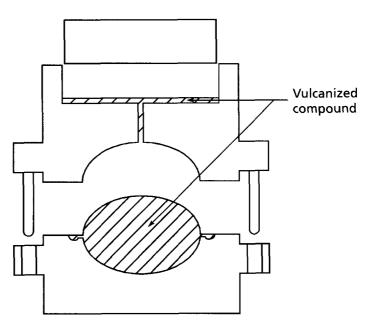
Conceptual cross section through a transfer mold - transfer mold opened after cure (courtesy of the Holz Rubber Company)
